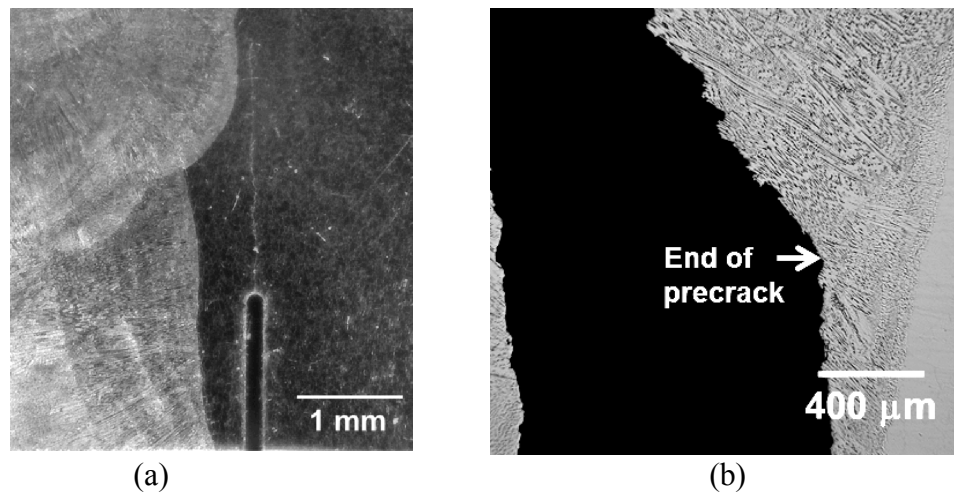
(a) Optical image of 304L/308L HAZ 3PB sample of precrack extending out of machined notch into HAZ adjacent to a multi-pass GTA weld. (b) Extension of precrack into FZ of 21-6-9/308L HAZ-6, subsequent fracture test shows propagation of crack along δ -ferrite dendrites into the weld.
